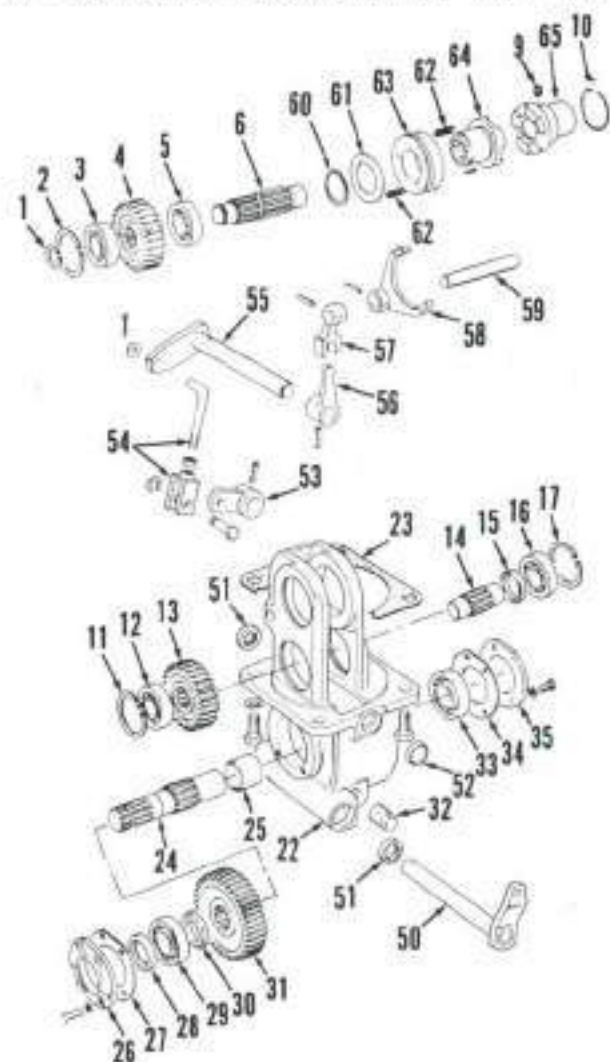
Exploded view of transfer gearbox used on Models 1294, 1394, 1494 and 1594 equipped with synchronmesh transmission and Carraro front drive axle. Shift linkage is slightly different on Model 1594. Refer to Fig. 39 for legend except for the following items.
